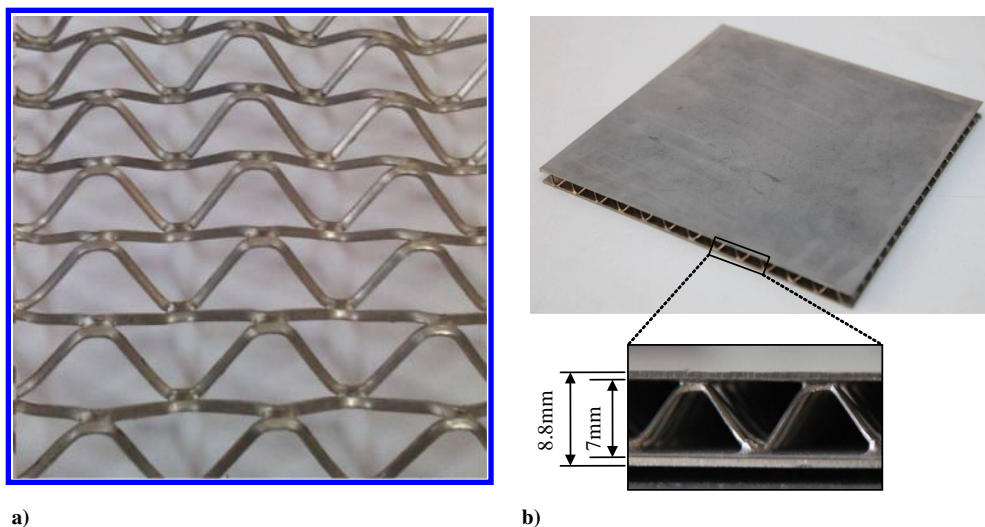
Fabricated sandwich panel: a) folded truss core, and b) a sandwich panel with truss core.
